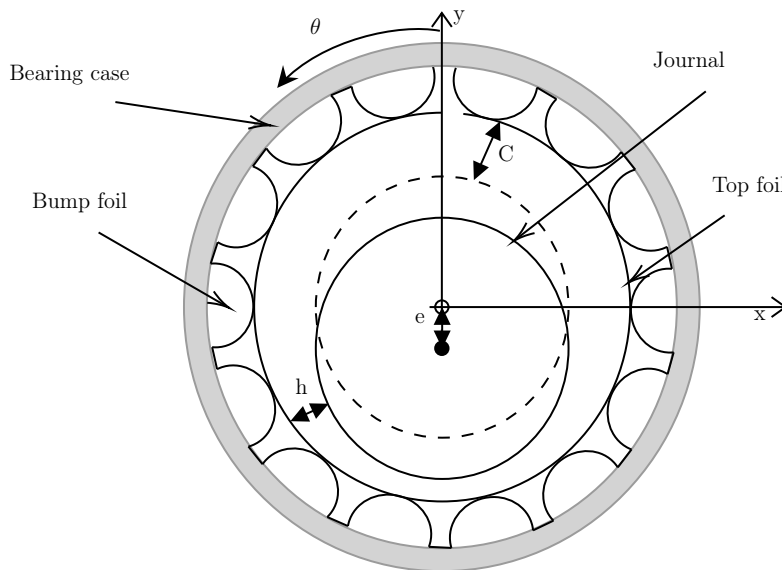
Bump gas foil bearing with a single 360° pad.
